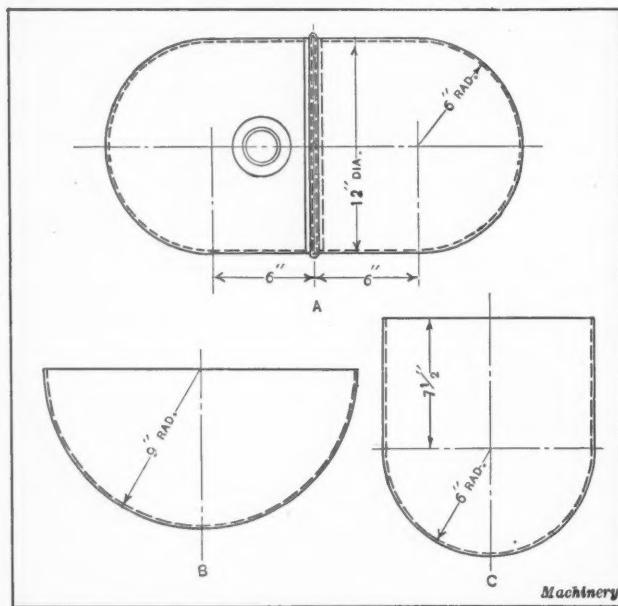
(A) Gasoline Tank composed of Two Sheet-steel Sections; (B and C) Steps in the Manufacture of the Tank Sections when Single-action Dies are used
